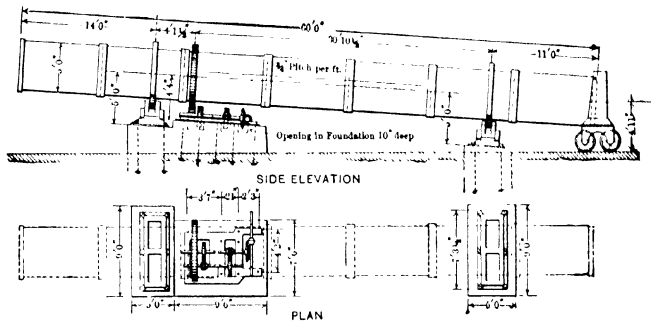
Plan and elevation of 60-foot rotary kiln (Engineering News)
